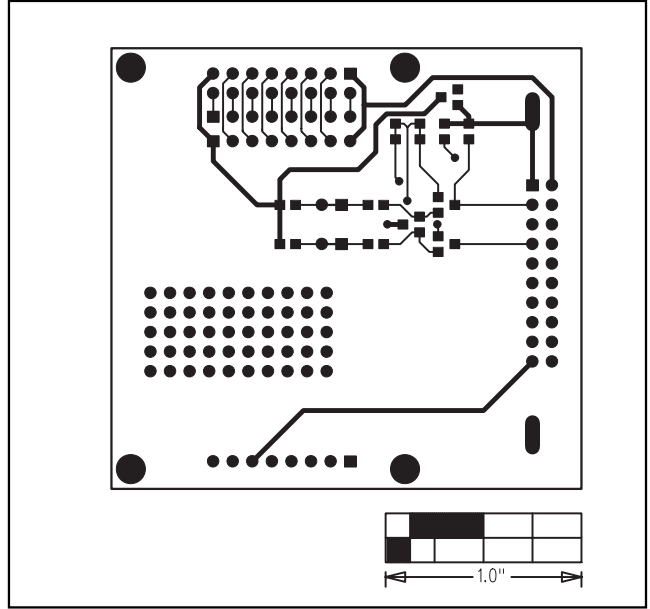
MINIUSB-XHV Expander PCB Layout—Component Side
